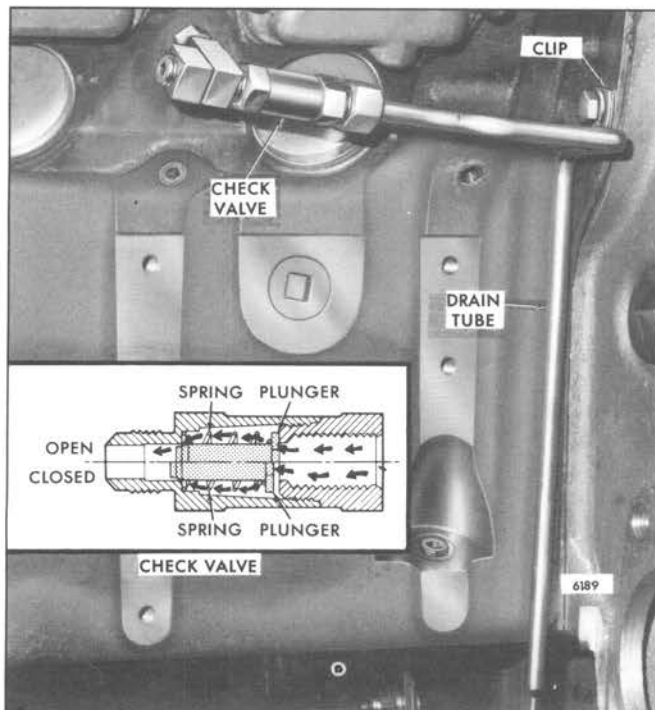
Open Air Box Drain Tube and Check Valve System
